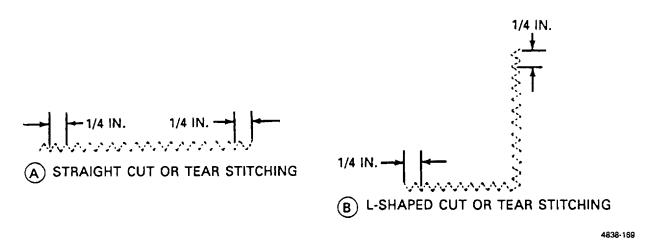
Repair Method Using a Zig-Zag Sewing Machine.
